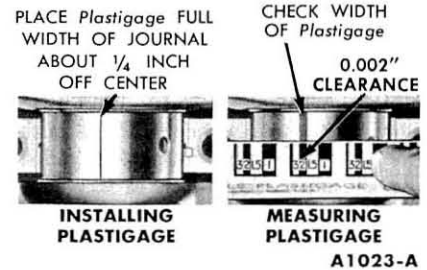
Installing and Measuring Plastigage—Engine Removed
